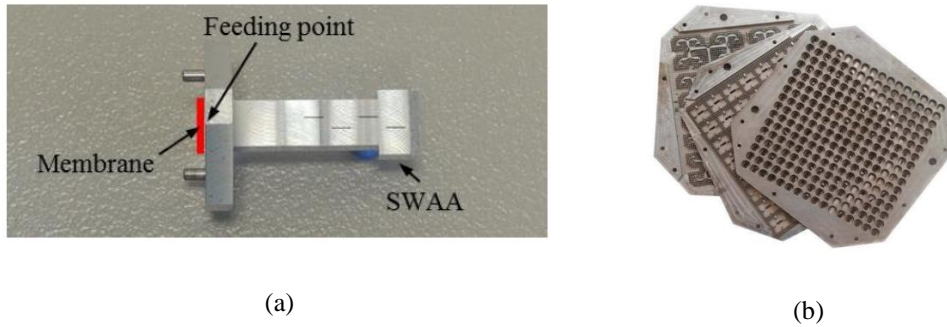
Photograph of the array antenna fabricated by (a) wire EDM and (b) die-sink EDM [21, 22].
